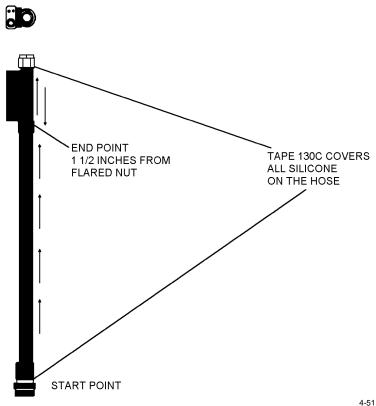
Regulator to Survival Kit Hose Assembly Taping
